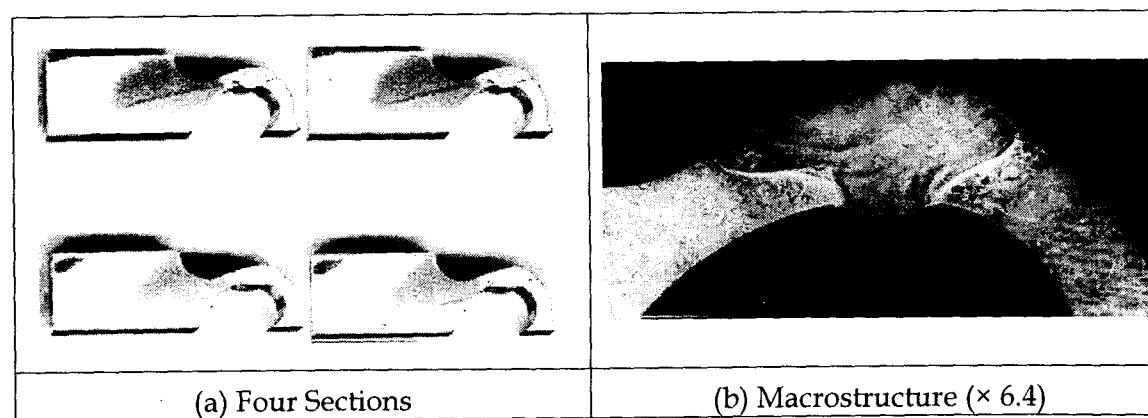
The Macrostructure of Lower Omega Seal Welding Joint
